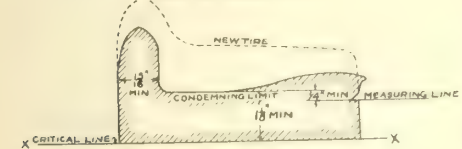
STEEL TIRE SHRINKAGE FASTENING ONLY
